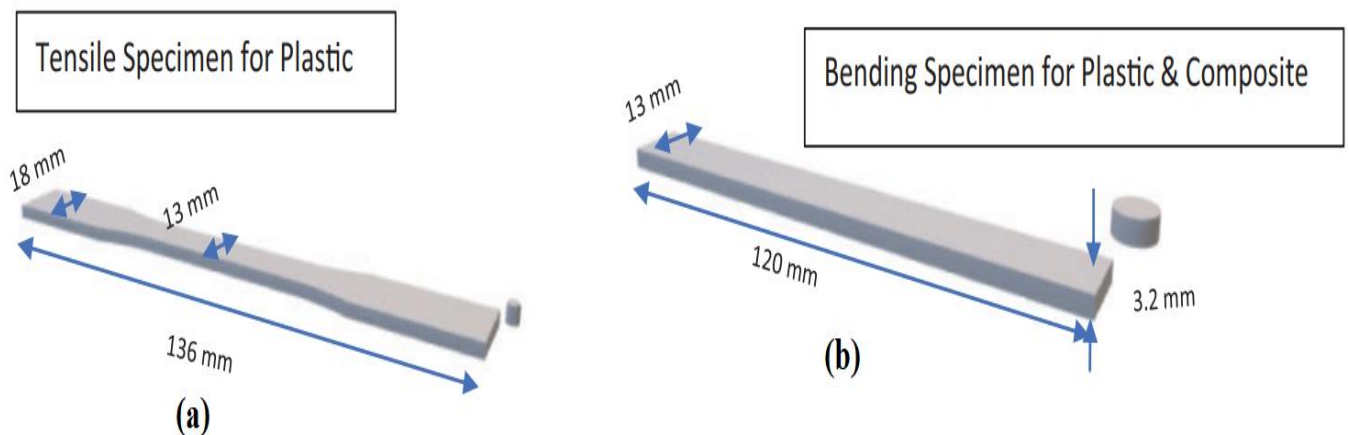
Testing specimens: (a) ASTM D-638, (b) ASTM D-790
